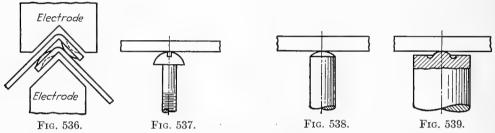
Design of embossed corners, formed over one another and welded between V-shaped electrodes.
